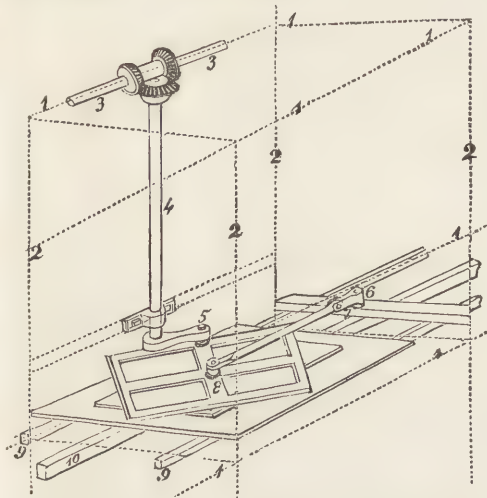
PRINCIPAL PARTS OF GRINDING-MACHINE.
